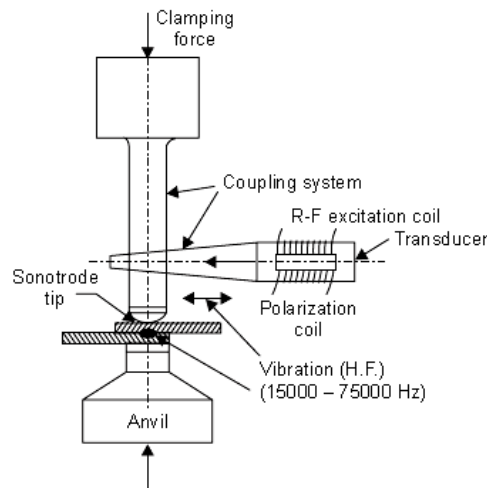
(b) Ultrasonic welding (detailed sketch)
